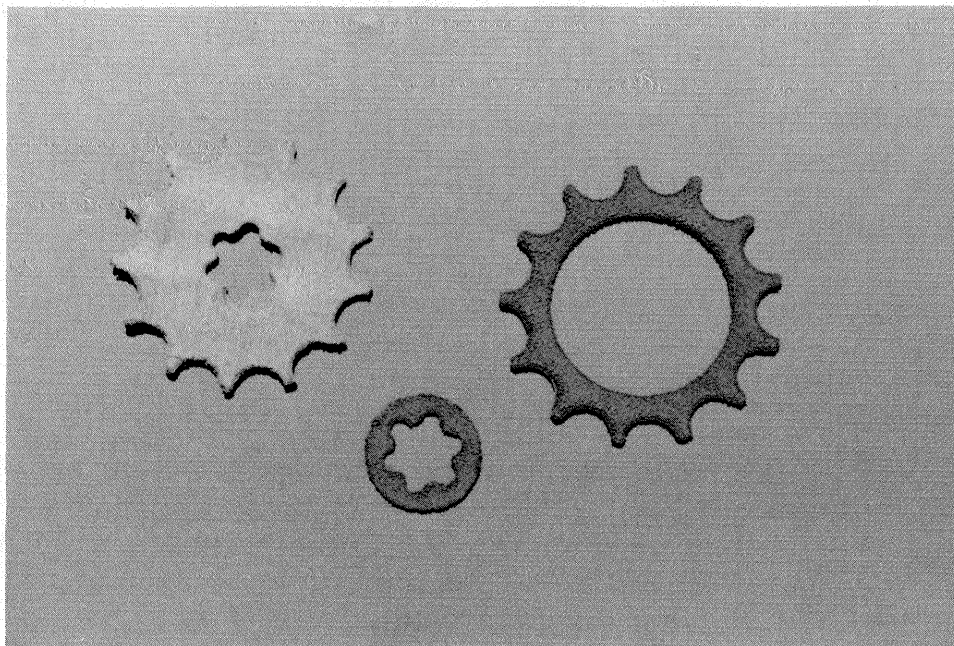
An example of the present capability of the SLS technique to fabricate metal parts. The powder used to fabricate these parts was a mixture of Cu and Sn/Pb solder. Each part consists of several layers that were individually processed by selective laser sintering of loose powder. The largest two parts have an outside diameter of about 3 in each.
